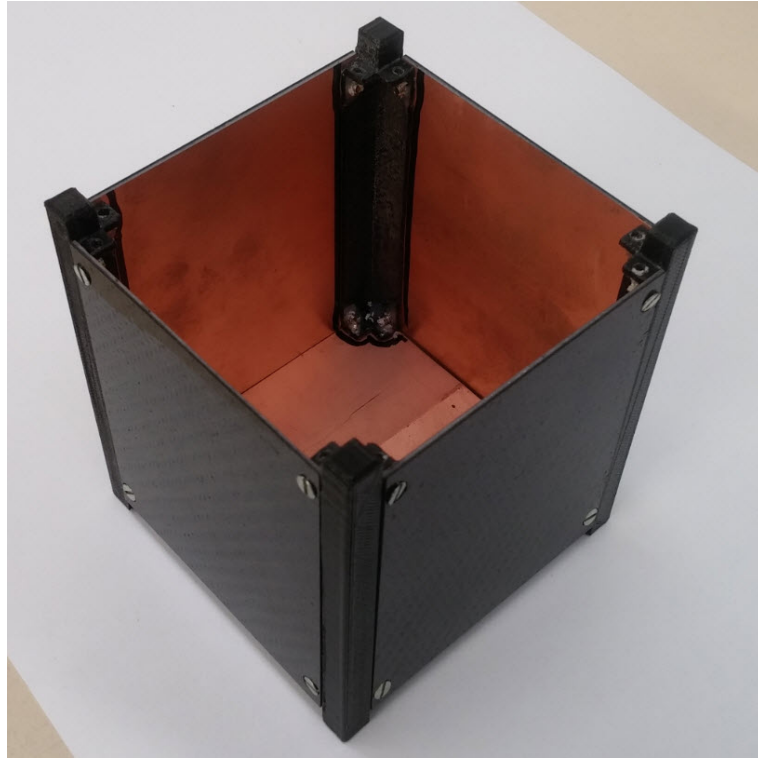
Internal copper layer of the mock-up model before PCB circuitry machining.
